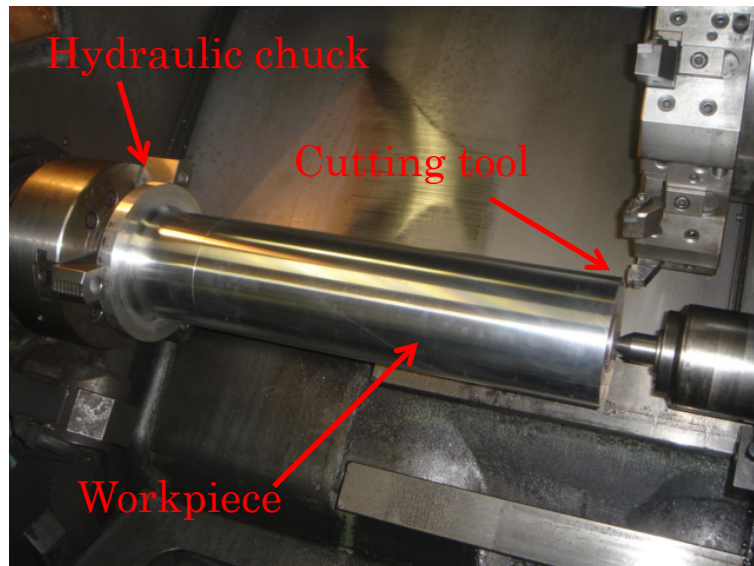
Ready to cut FCD700 mounted on the NC lathe.
